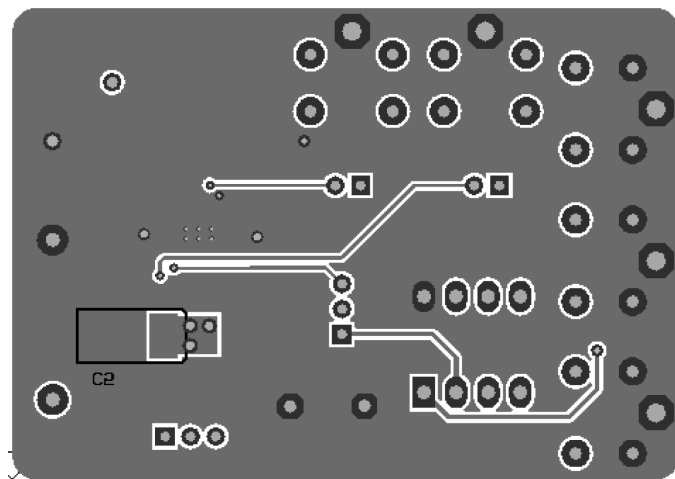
AAT1290 Evaluation Board Bottom Side Layout.
